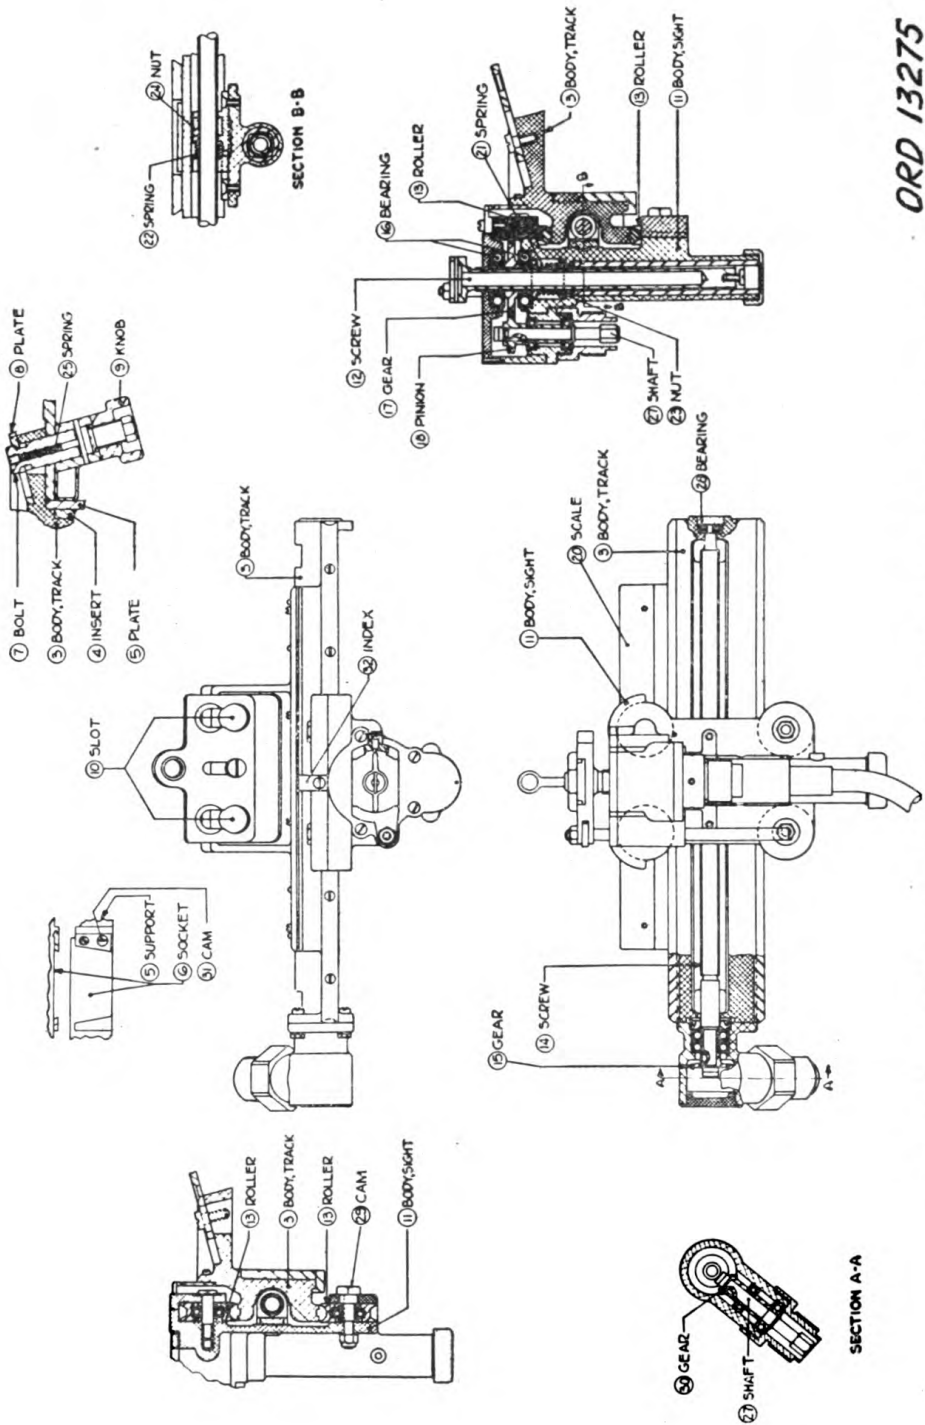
Antiaircraft machine-gun mount, caliber .50, M2, sight assemblies.
